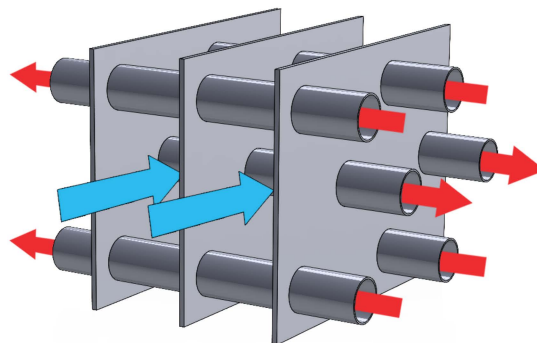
Close-up illustration of the plate-finned tube heat exchanger design; including hot and cold flow directions shown by red and blue arrows, respectively.
